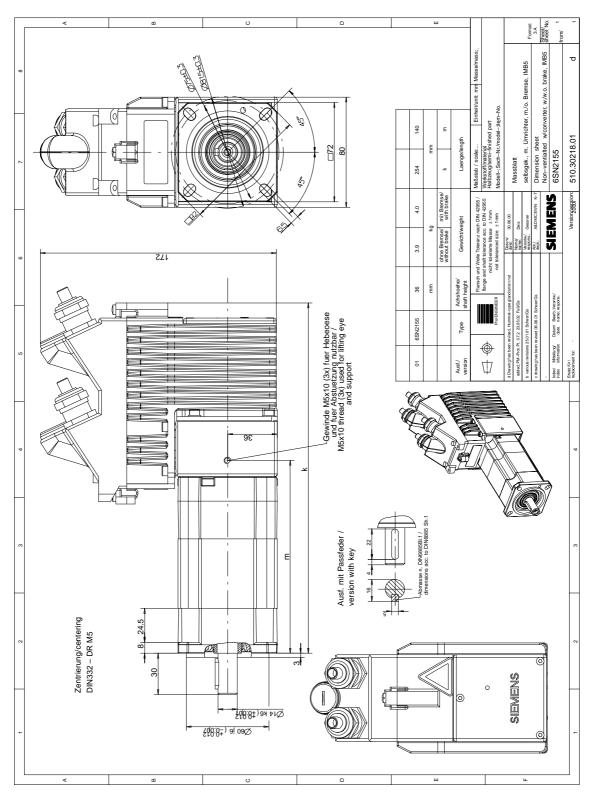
Dimension drawing: SIMODRIVE POSMO A – 300 W without gearbox
